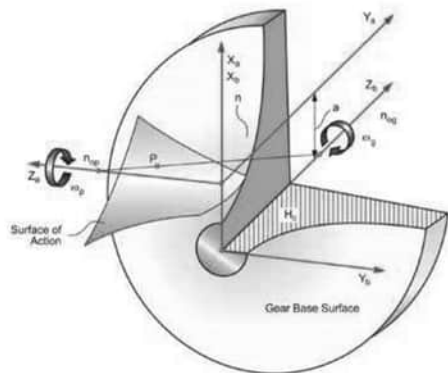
Surface of action connecting the gear and pinion base surfaces.
